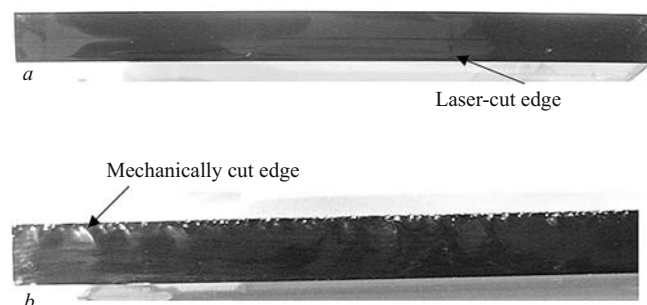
Edges of glass samples (from the end) after laser (a) and mechanical (b) cutting.
